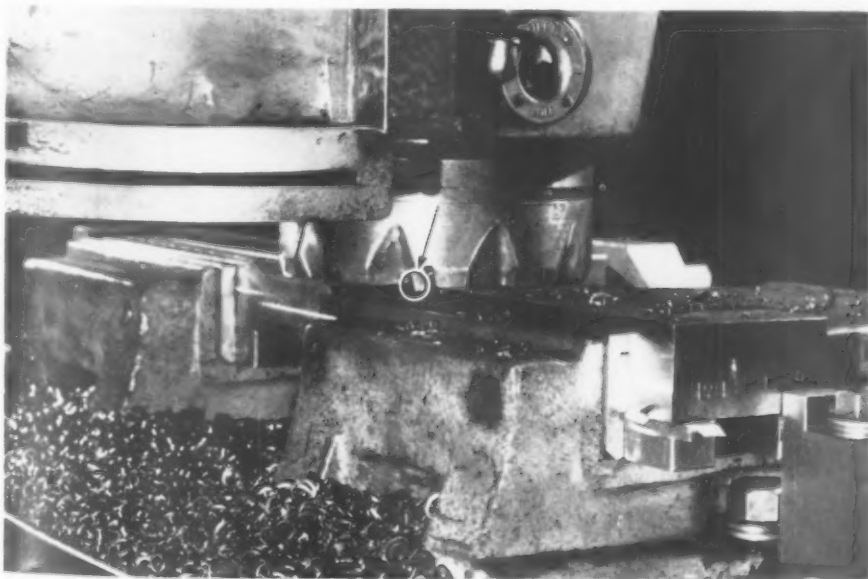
, left. Milling a heavy shear blade with a carbide cutter at a cutting speed of 450 fpm and 31 ipm feed. The cutter has solid carbide tips positioned at a 15 deg pos. radial rake angle which can be easily adapted to milling various materials. A large chip space is provided in front of the tooth which guides and shapes the chip. The encircled part of the tooth is shown in Fig. 2. Fig. 2, right. Wear of carbide tip. Should be reground at this stage.
